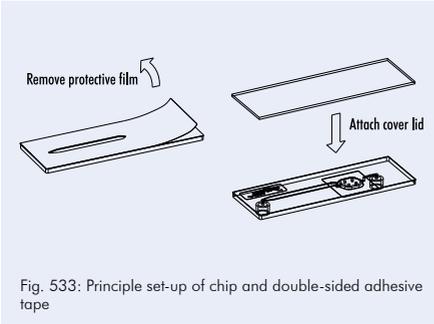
Principle set-up of chip and double-sided adhesive tape
